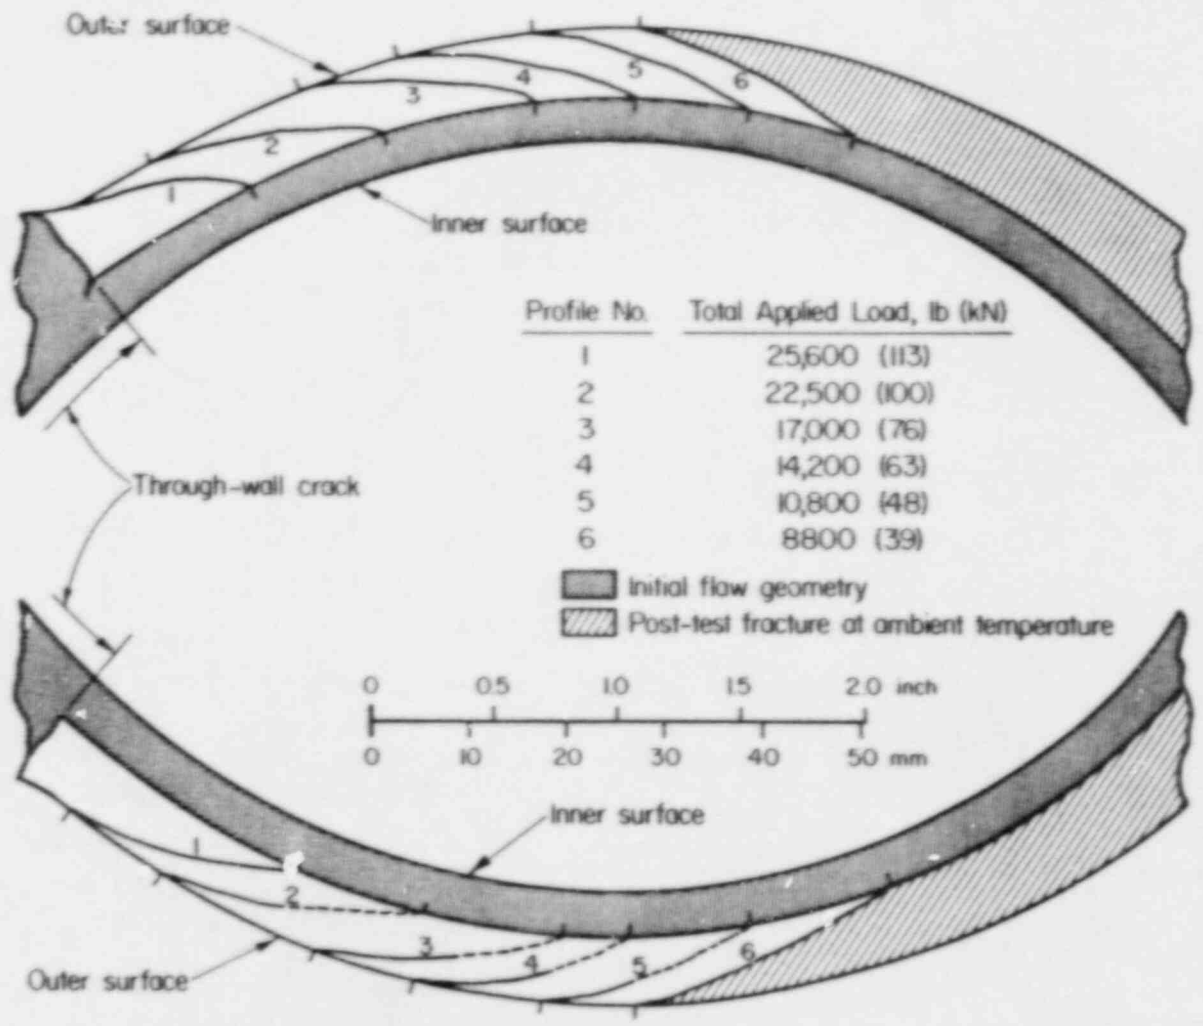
DETAILS OF CRACK PROFILES OBSERVED FROM THE PIPE FRACTURE SURFACE SHOWN IN FIGURE 12
